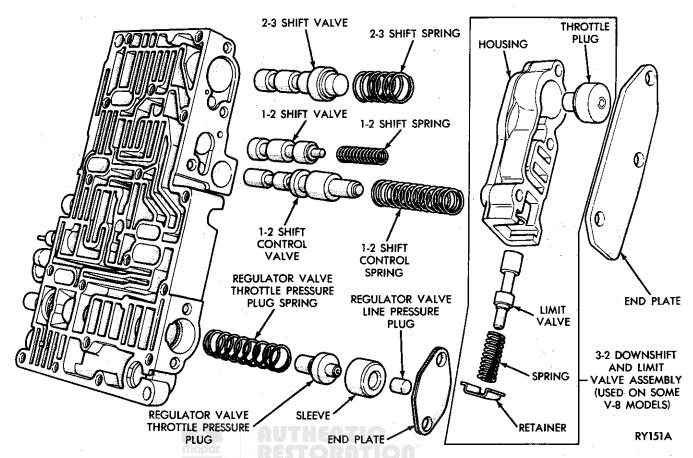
Shift And Pressure Regulator Valves/Plugs
